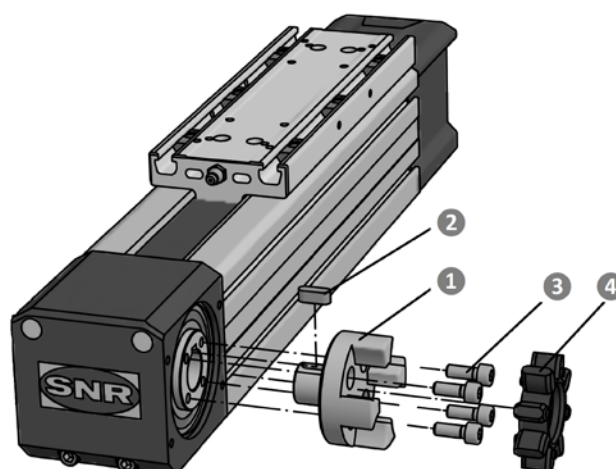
Force-fitted mounting of couplings on Linear Axis with toothed belt drive
